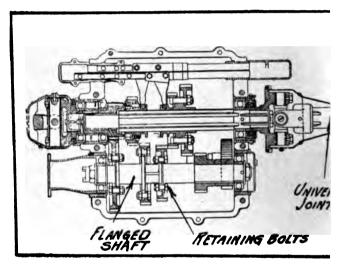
Four Speed Selective Sliding Gearset of Approved
